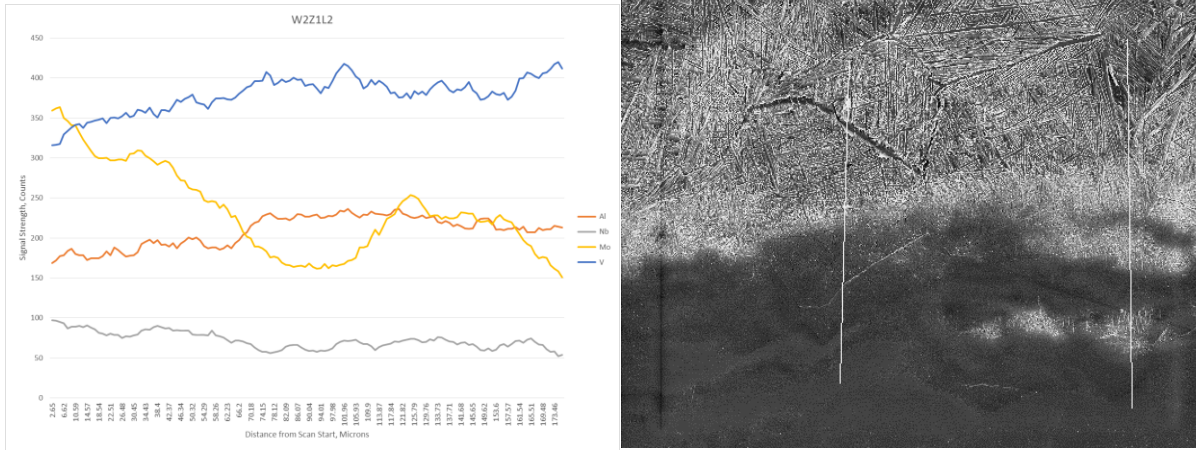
Weld 2, Zone 1, Line 2 (right).
